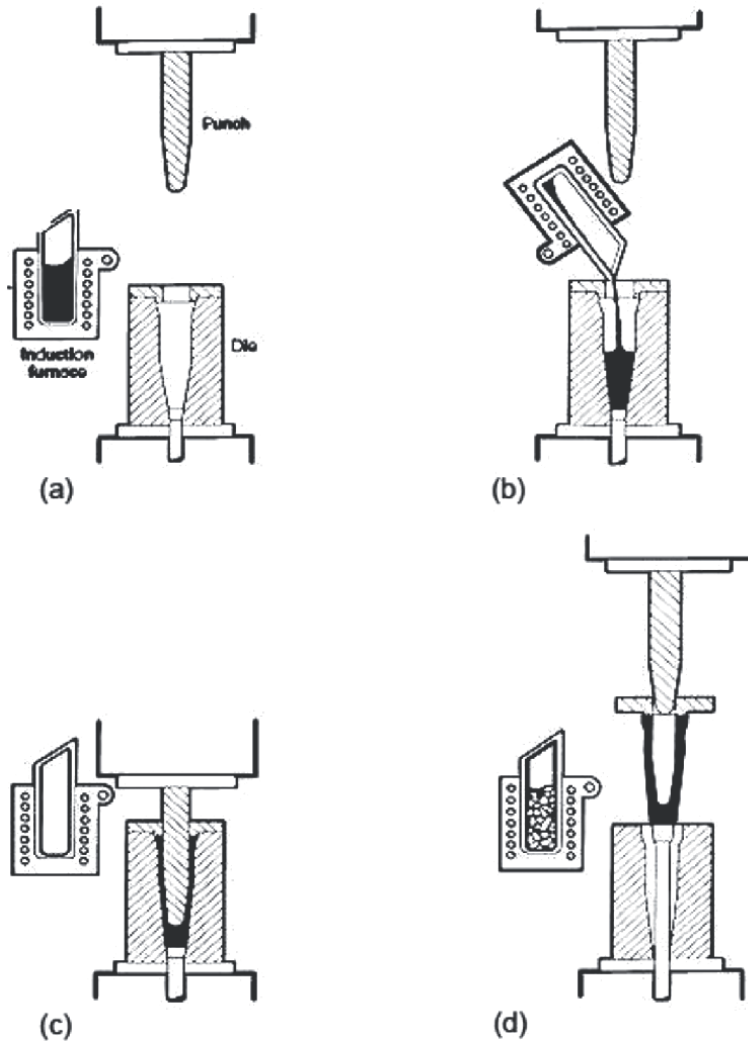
Schematic illustrating squeeze casting process sequence of operations. (a) Melt charge, preheat, and lubricate tooling. (b) Transfer of melts into die cavity. (c) Close tooling, solidify melt under pressure. (d) Eject casting, clean dies, charge melt stock [18].
